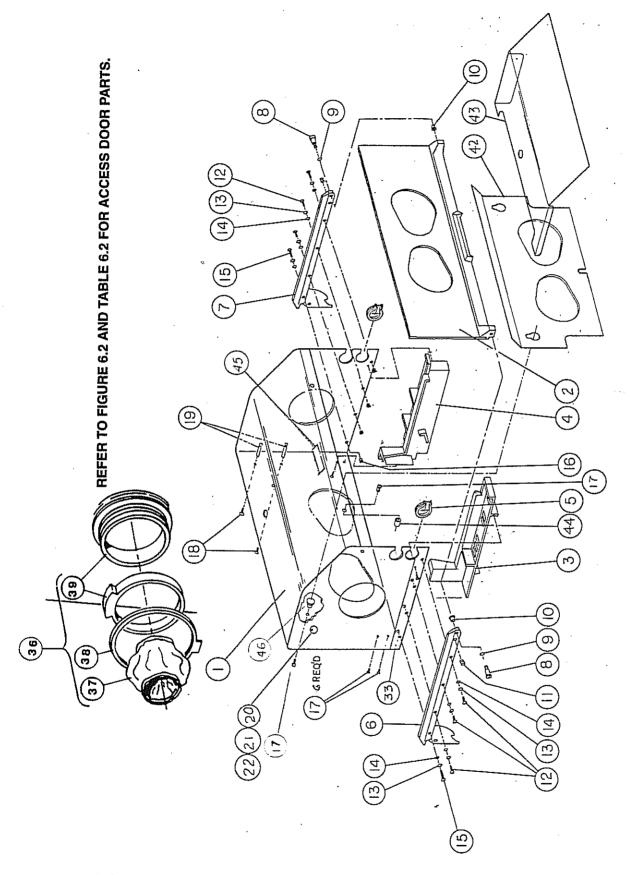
PARTS LOCATION DIAGRAM, HOOD ASSEMBLY, GROUP 2 UNITS
